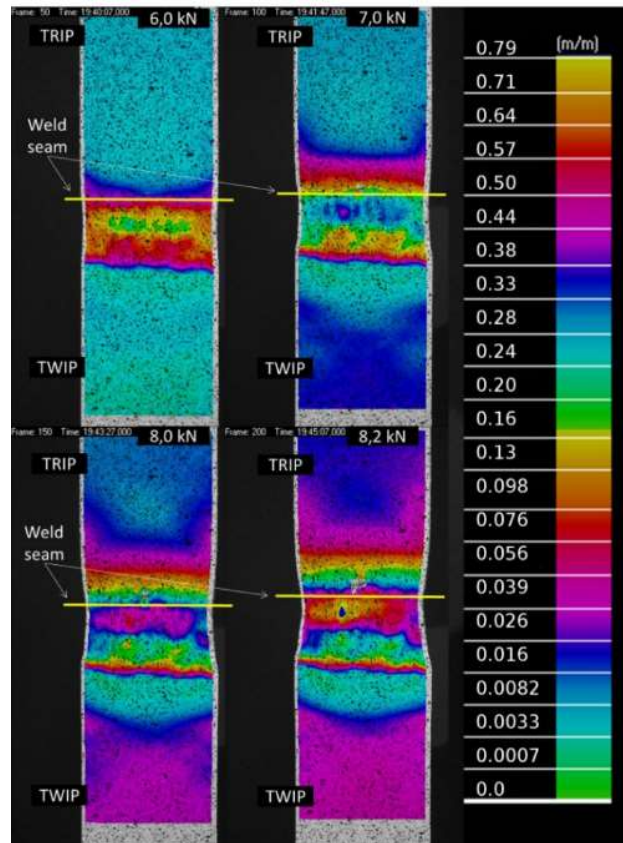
Total equivalent strain on macro-specimens during a tensile test at four load stages: 6 kN, 7 kN, 8 kN, 8.2 kN. The yellow horizontal lines show the center of the weld seam.
